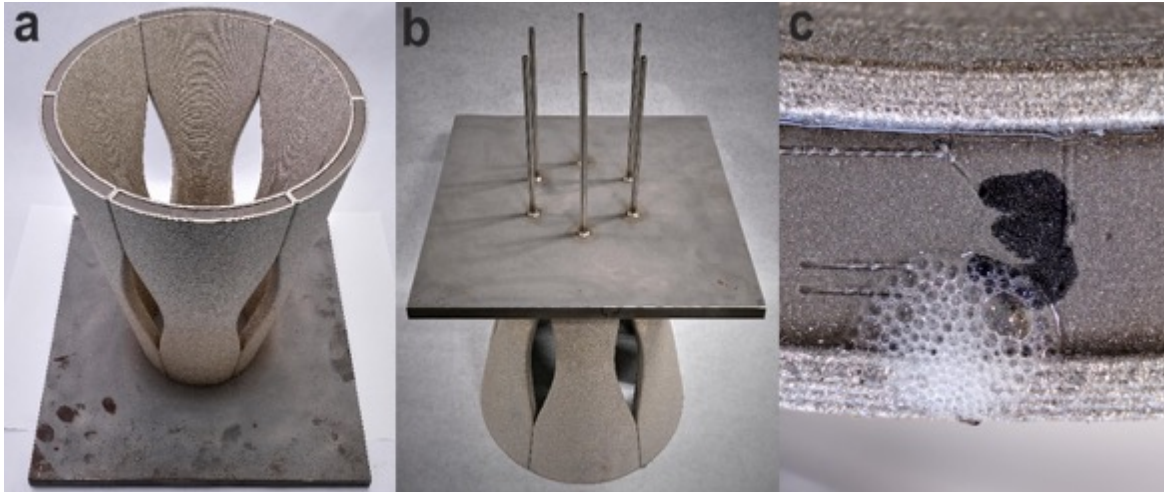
Six-chamber 316L SS DED HIP structure: (a) top view showing welded top plates, (b) bottom view showing six tubes for powder filling and pressure testing, and (c) soap bubble leak observed during pressure testing.
